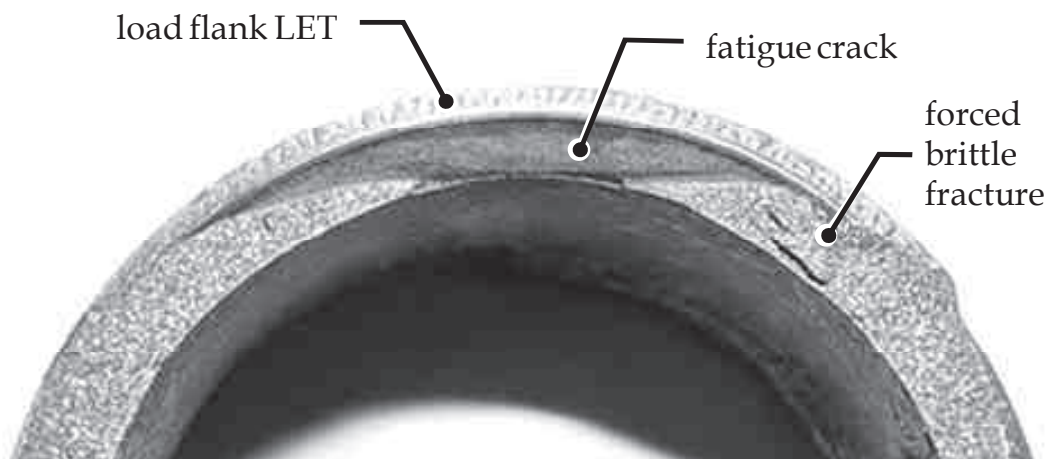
Fracture surface of a fatigue crack in a standard 1" BSPT specimen.
